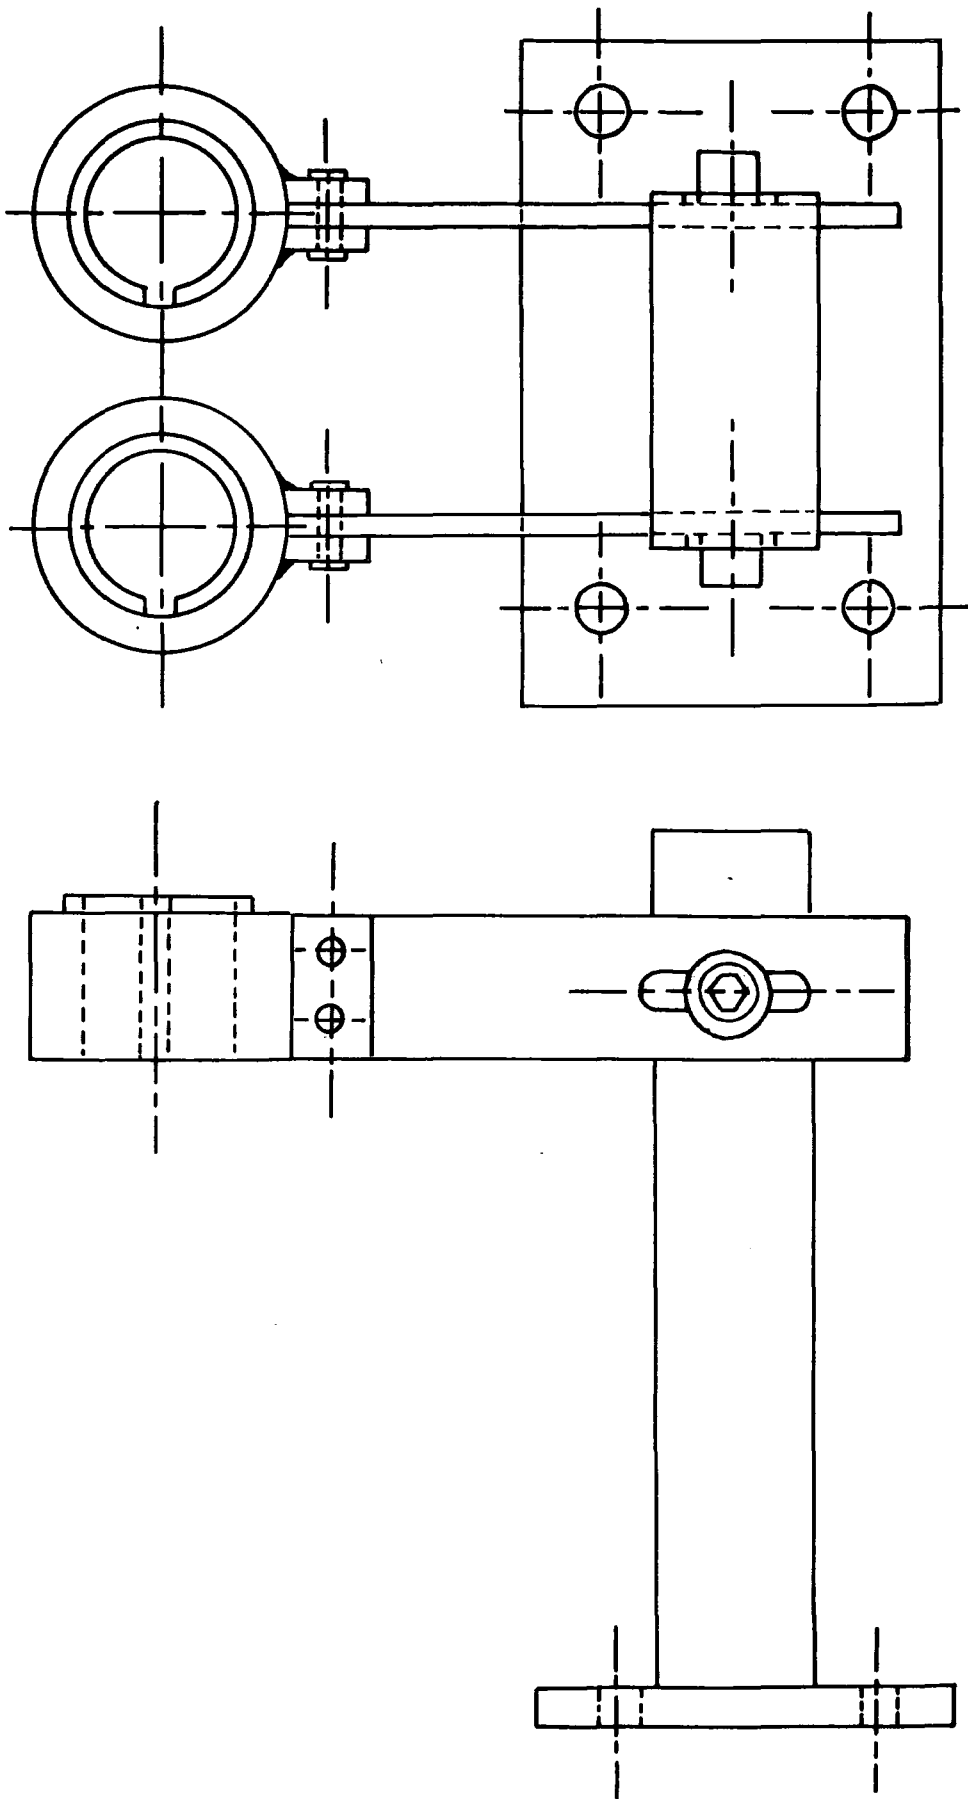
Wear rig cantilever support and bushes to hold test pins stationary above the plate sledge.
